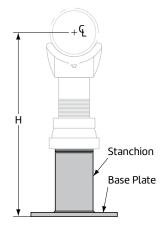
, Type T Square Cut Threaded End for use with Figure 264 or 265 Adjustable Pipe Saddle Support
